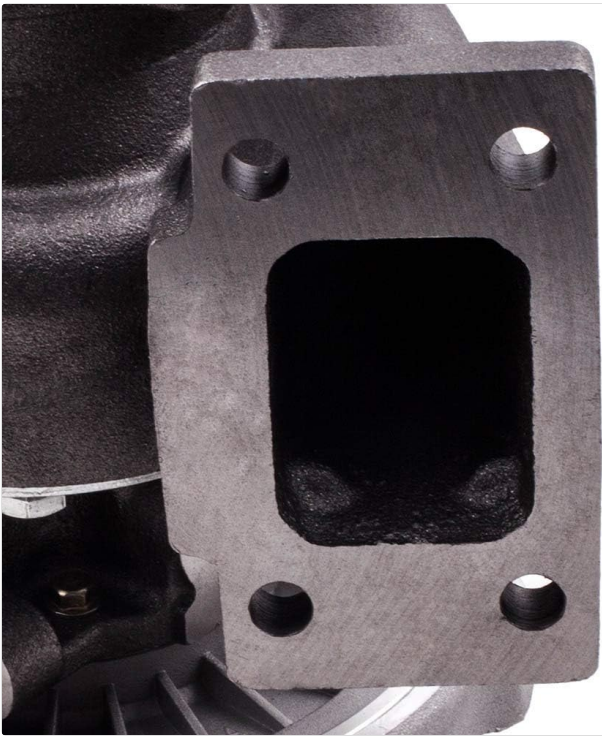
Close-up of the 4-bolt exhaust outlet flange.
